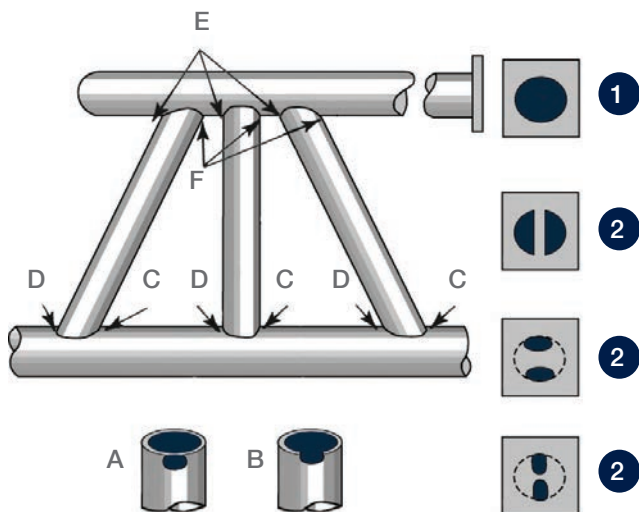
Vent and drain holes should be the same size as the tubing, or one of the shown alternatives
